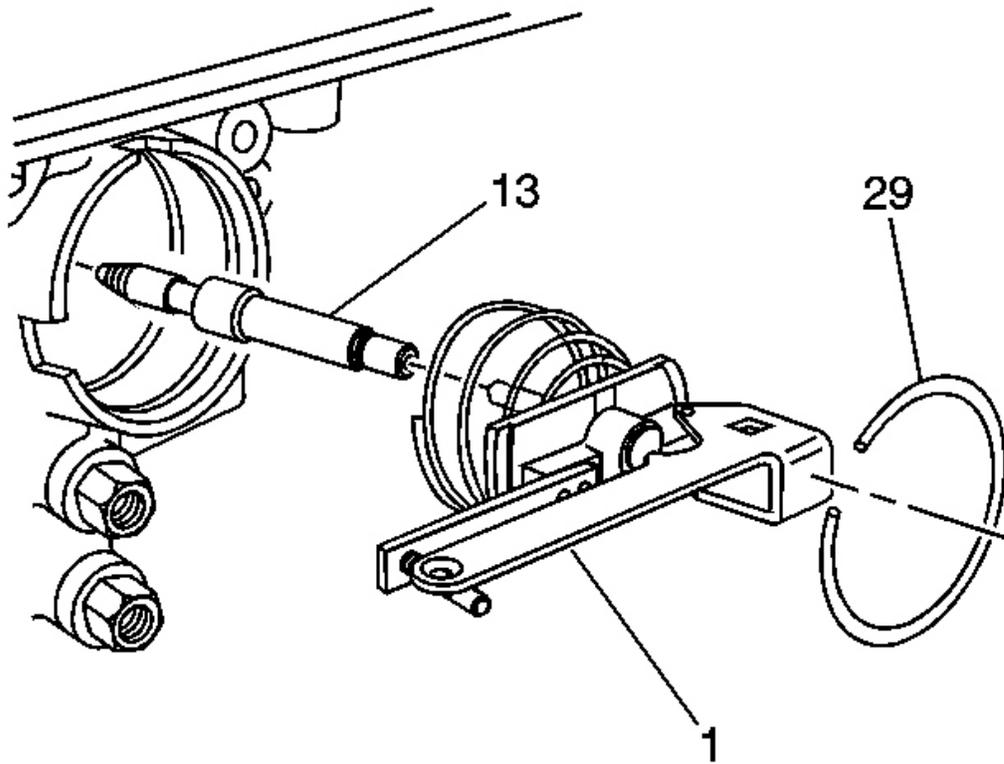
Installing Band Apply Pin & Servo Cover Retaining Ring
